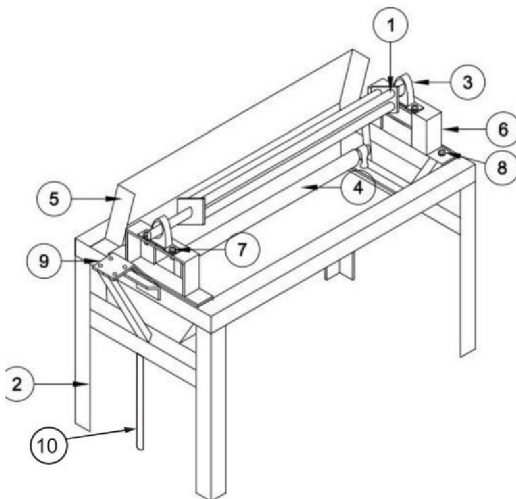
Assembled *Bofo* dyeing machine with labelled parts
